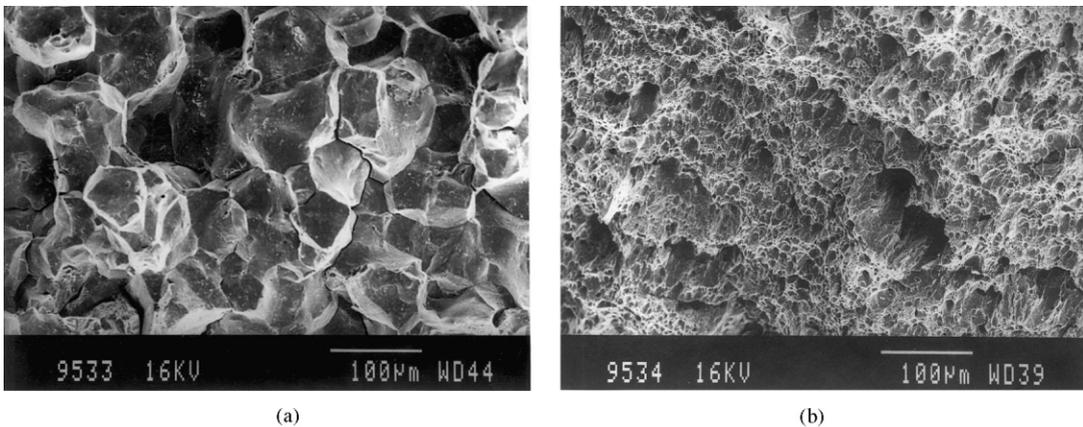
(a) Fractograph showing the fracture surface of the impact tested specimen of the failed stud; (b) fractograph showing the fracture surface of the impact tested specimen of the virgin stud.
